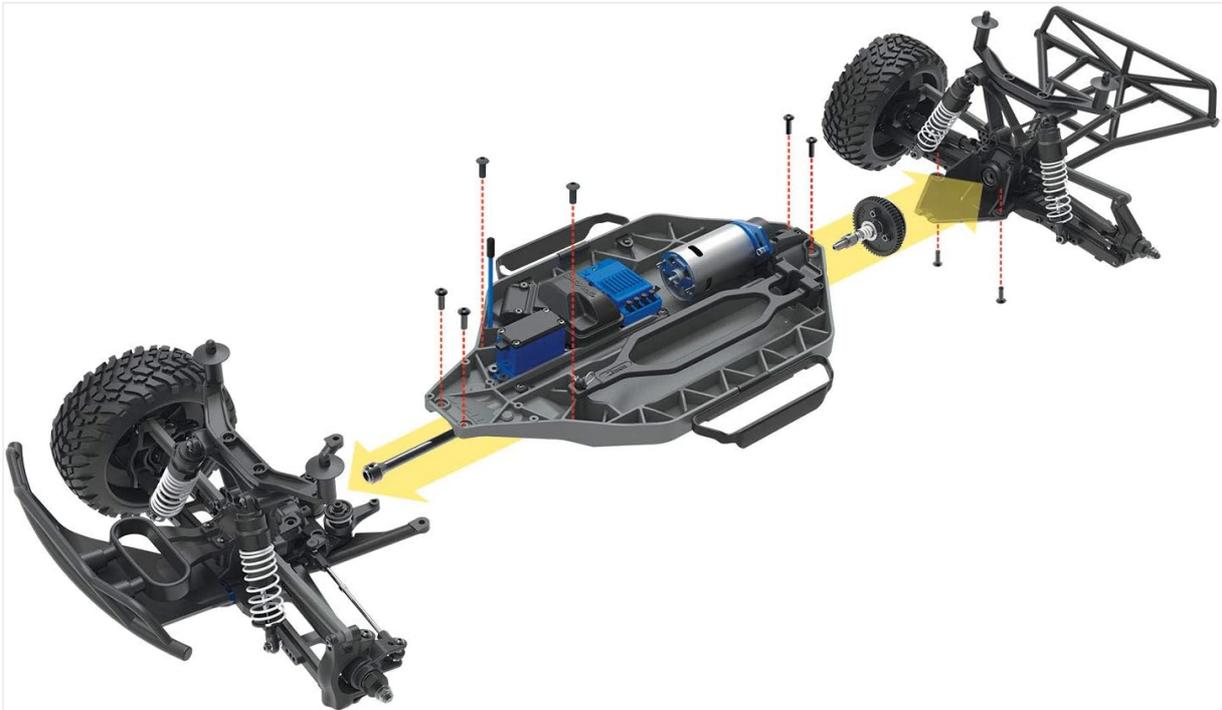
Exploded view of the Traxxas Slash 4X4 chassis. This diagram illustrates the modular design, showing how different sections of the chassis can be disassembled for maintenance or repair.
